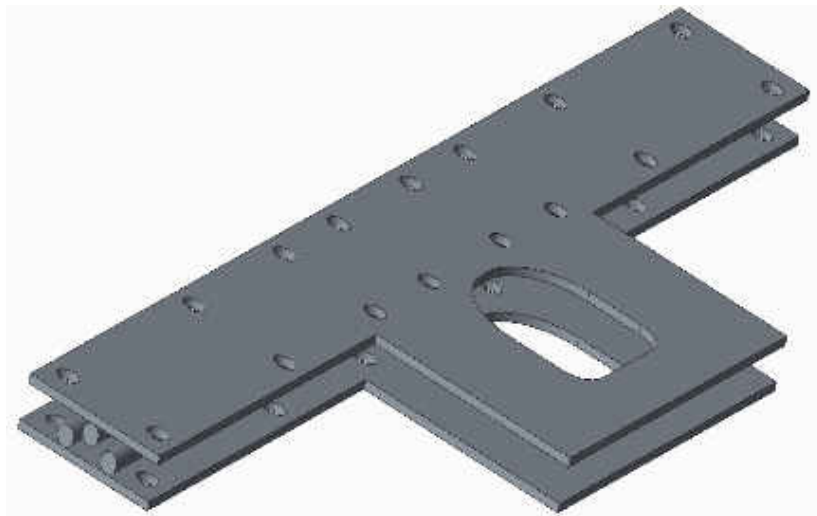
Custom Made Wrinkling Testing Fixture CAD Model
